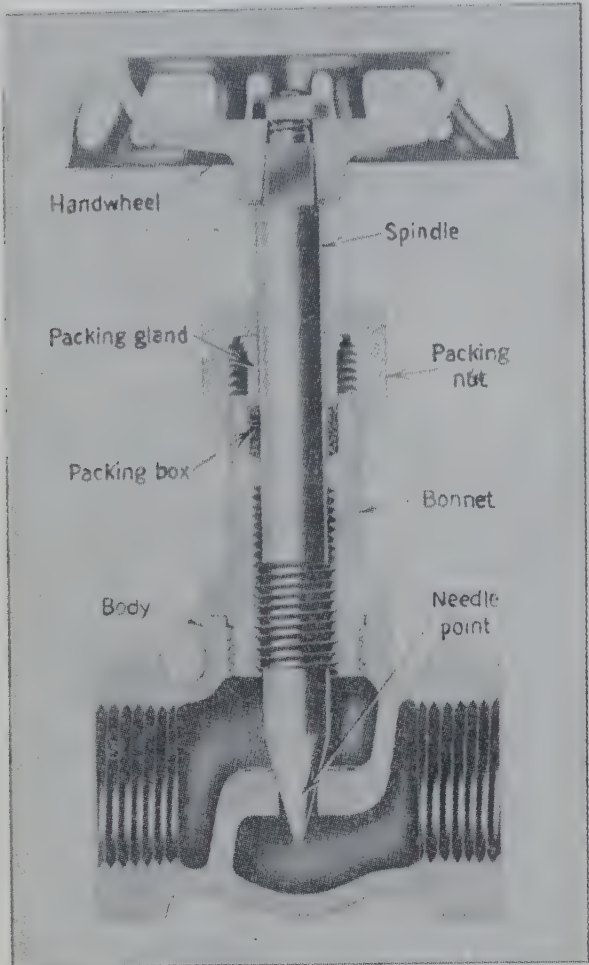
Needle valve (sectional view). (Jenkins Bros.)
